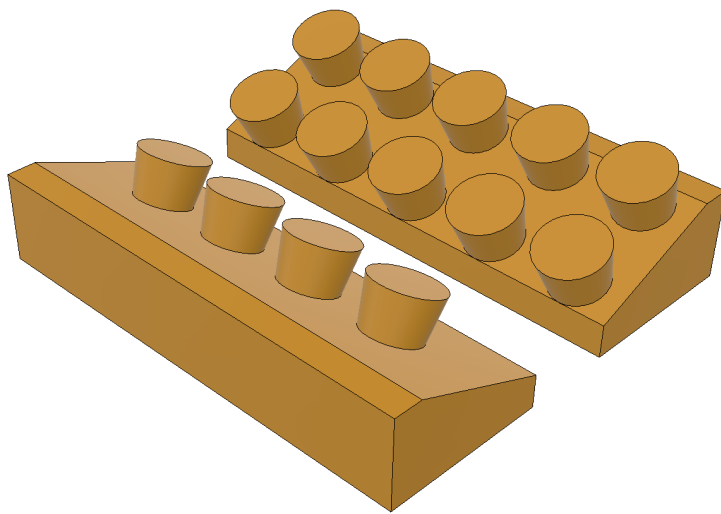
Interlocking nub connector, which forms 45° when assembled
